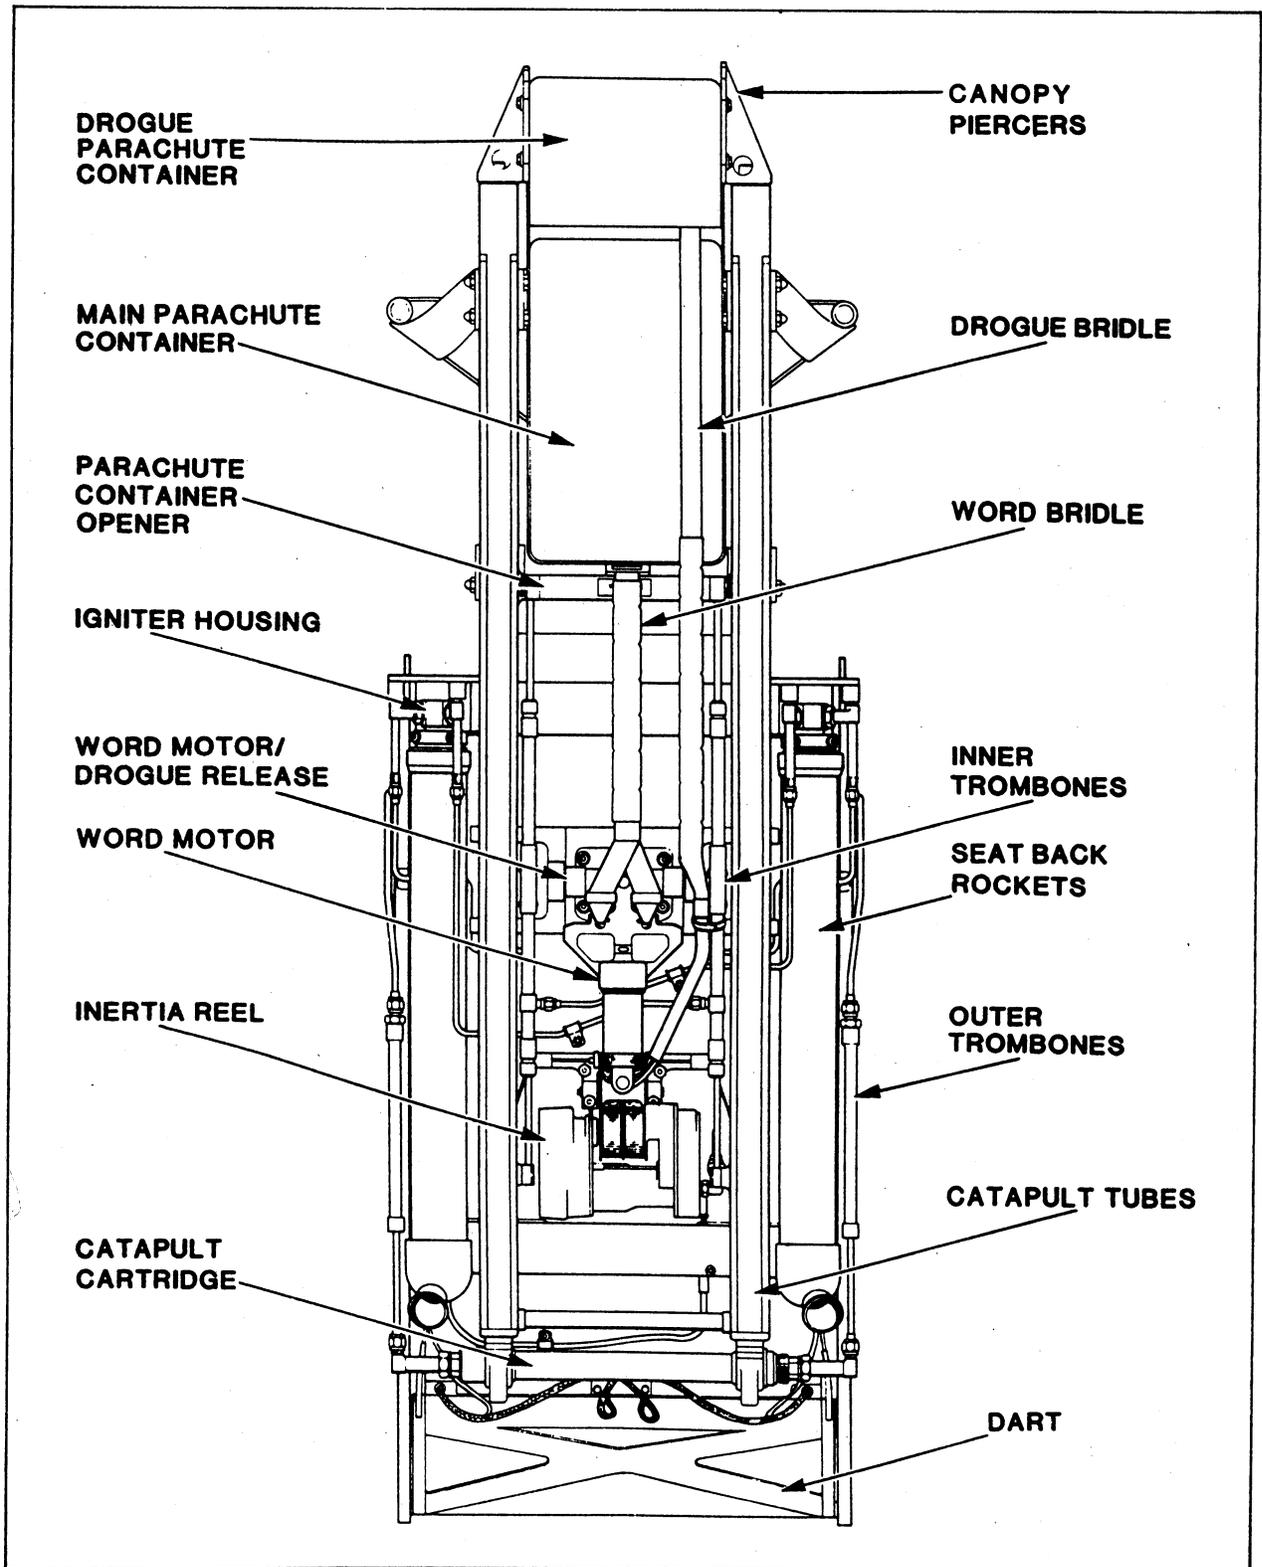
SJU-8/A ejection seat assembly (back view).
